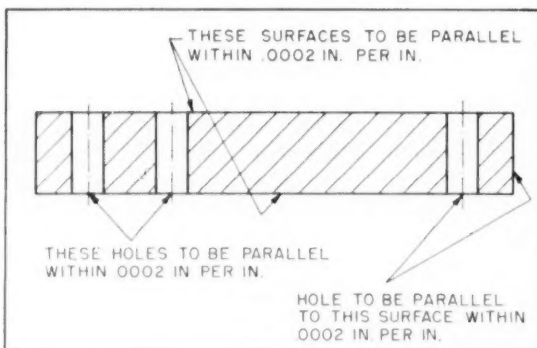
Tolerances relative to parallelism are specified by notes.
